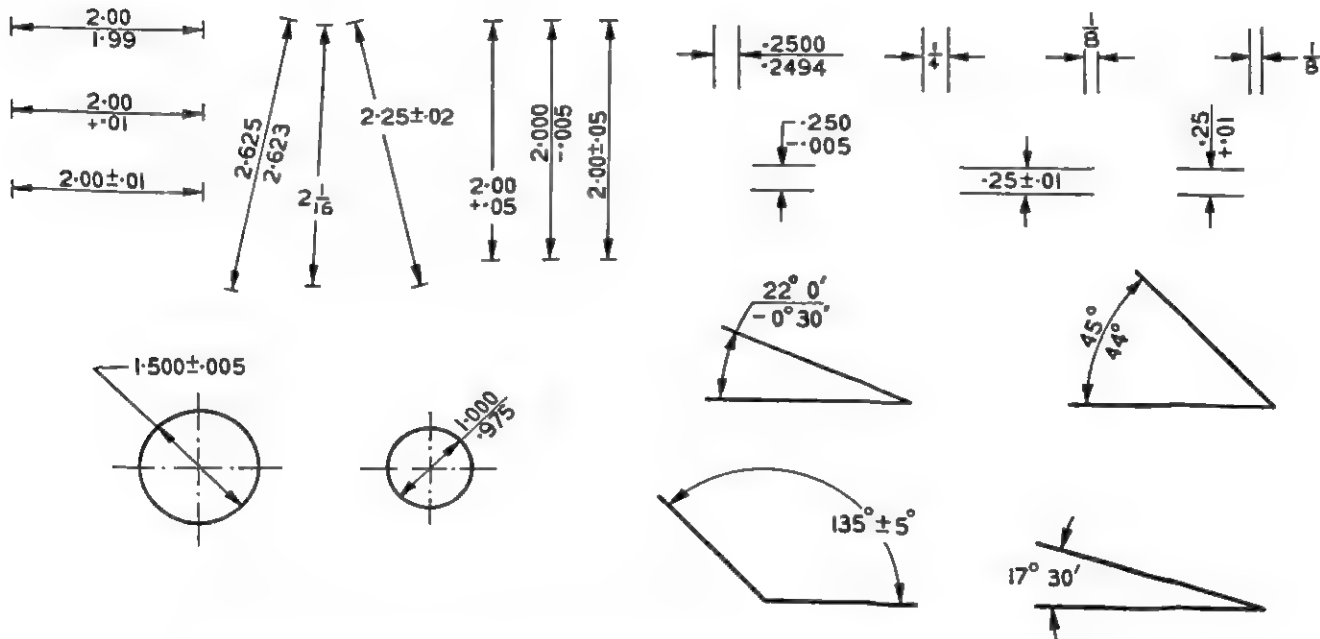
Placing dimensions to read from the bottom or the right-hand side of the drawing
